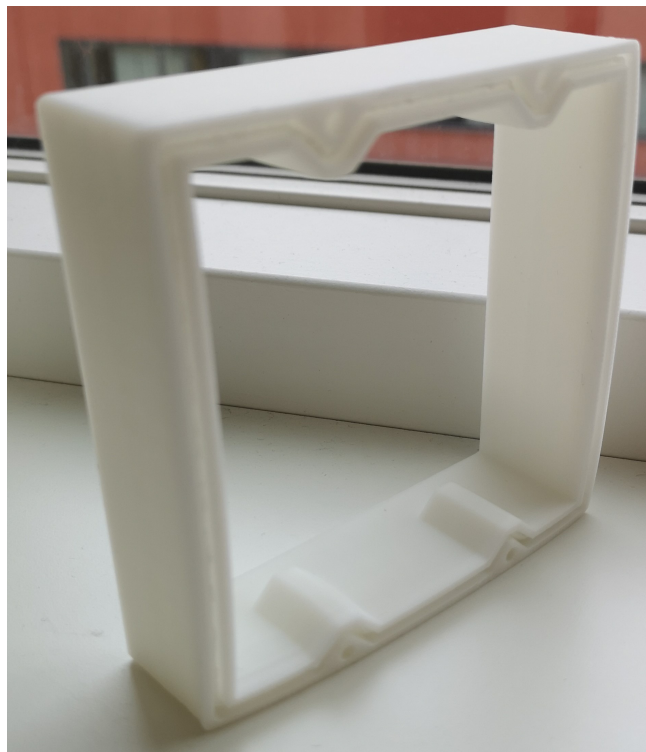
First 3D-printed prototype with tracks, female part B1.
